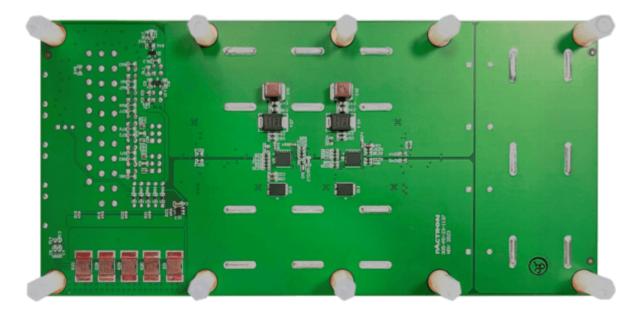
TIDA-050077 Reference Design: Bottom View
